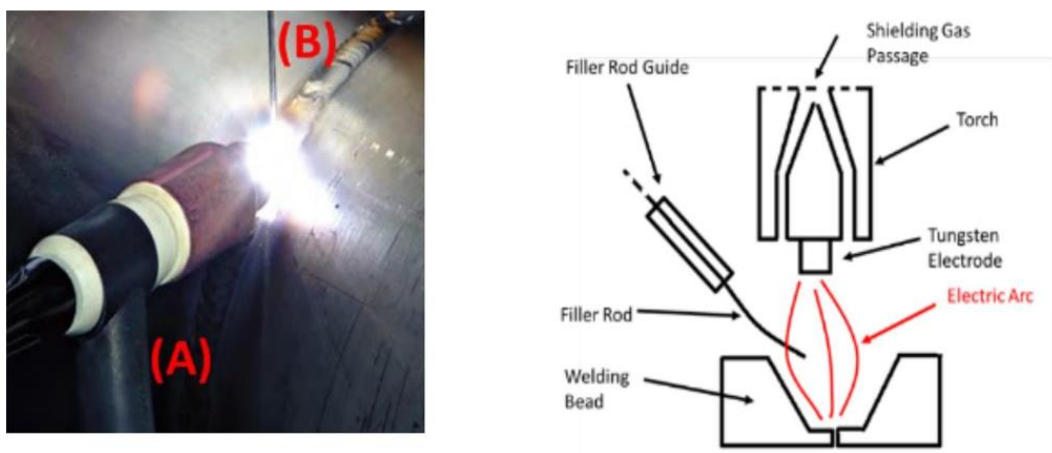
Sketch of a TIG welding set-up. Welding torch (A) and Filler rod (B).
